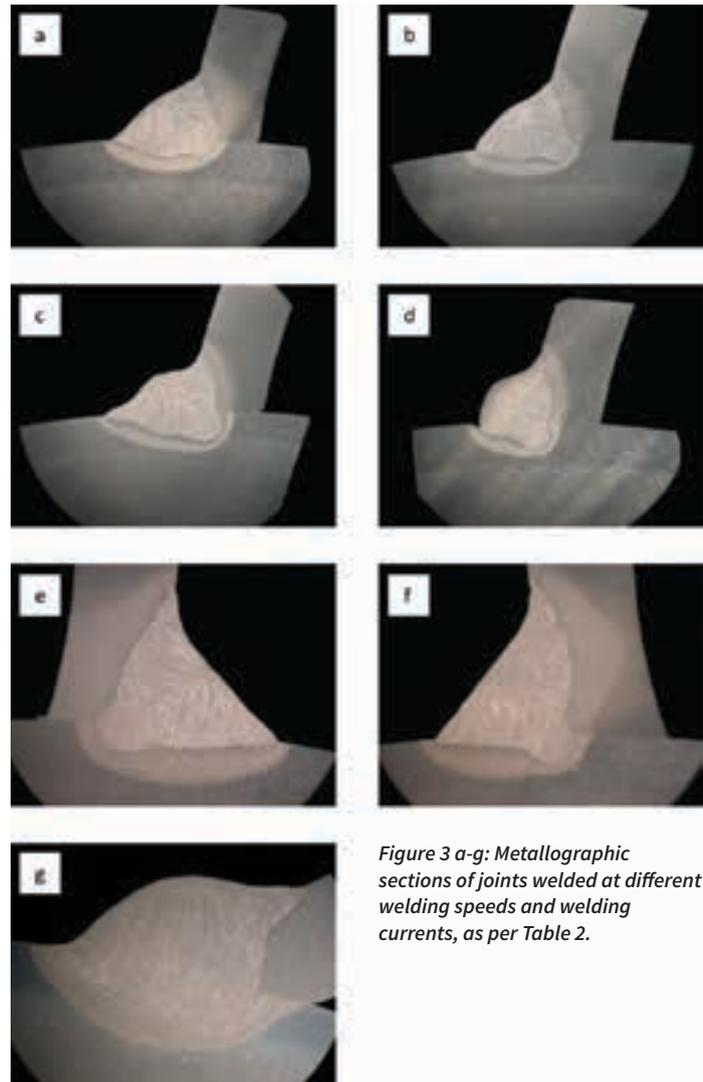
a-g: Metallographic sections of joints welded at different welding speeds and welding currents, as per Table 2.
